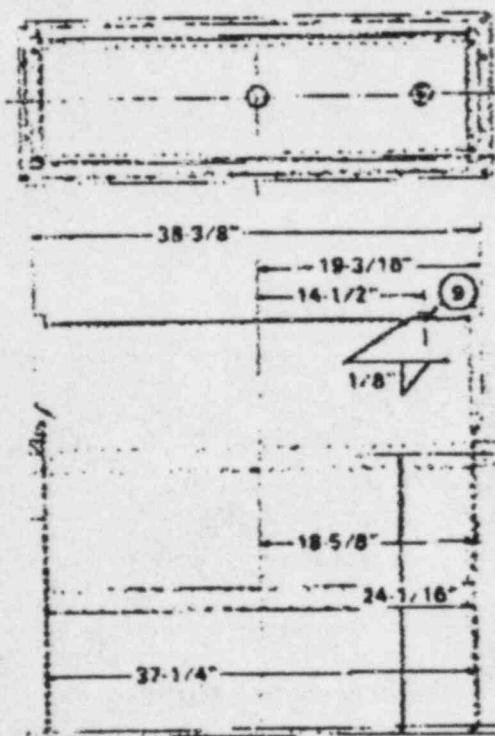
"S" Unit Oil Cooler Tank Flange Application
